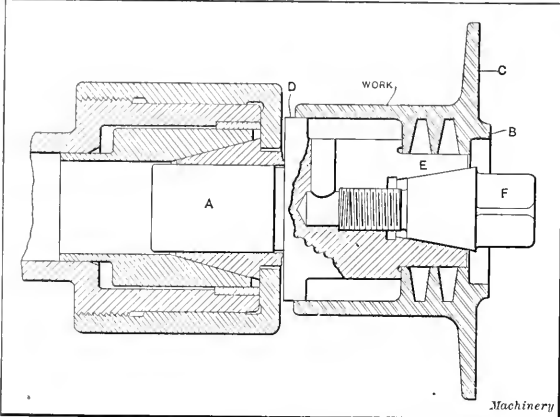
Arbor held in Collet and expanded by Internal Taper Plug
